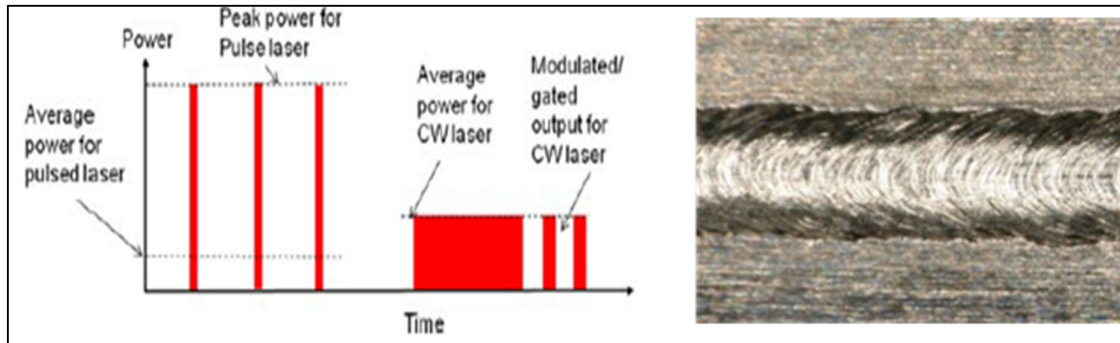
Continuous wave laser power and weld bead [17]
